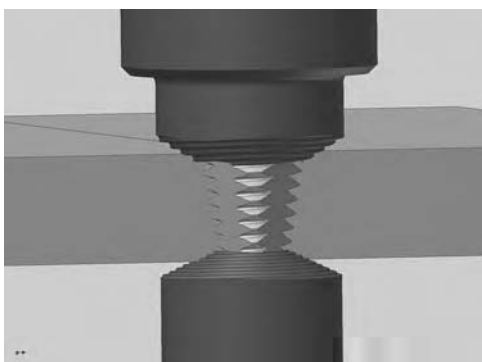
Model of a fixed-gap bobbin tool with tapered scrolled shoulders. Workpiece material is removed for clarity. Courtesy of Kevin Colligan, Concurrent Technologies Corporation
